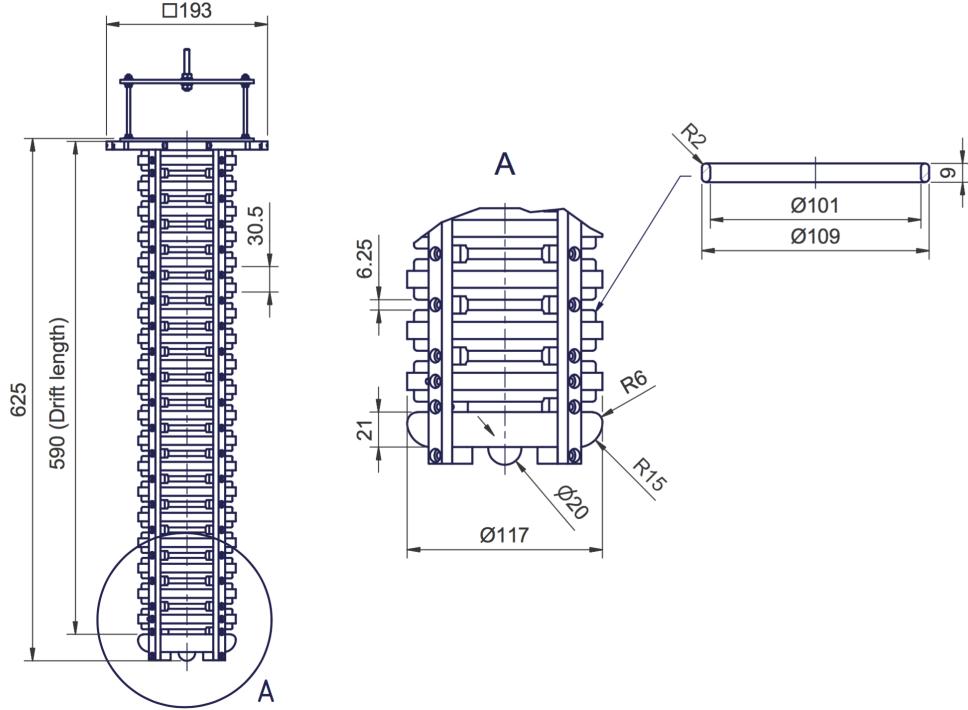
Engineering drawing of the pixel demonstration TPC; 590 mm drift length; 6.25 mm field cage spacing; 101 mm internal diameter.
